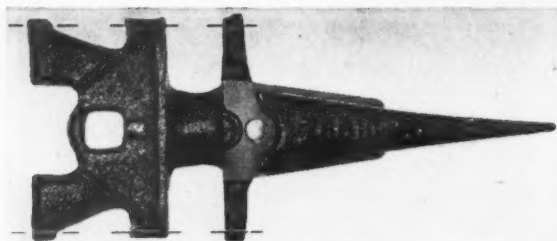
View of a cast steel mower blade guard, with dotted lines indicating surfaces that are trimmed in a shearing die with Carboloy Grade 55A tungsten carbide inserts
